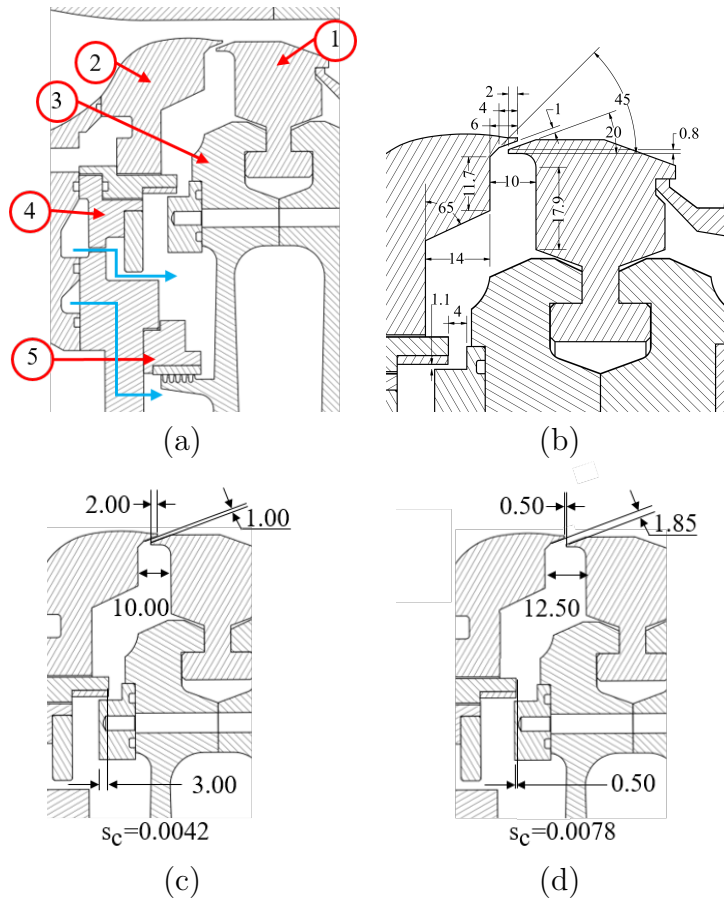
(a) Details of the working section geometry and purge flow supply, (b) details of the rim seal geometry (mm), (c) relevant dimensions for the small gap size, $s_c = 0.0042$, and (d) relevant dimensions for the large gap size, $s_c = 0.0078$.
